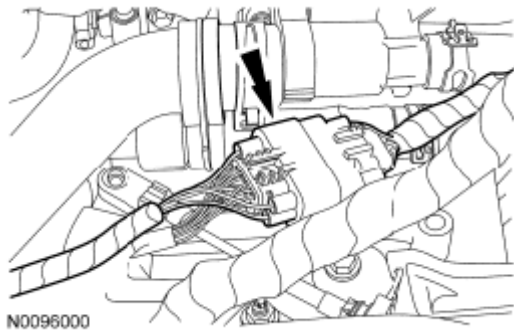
Locating Engine Wiring Harness Electrical Connector
